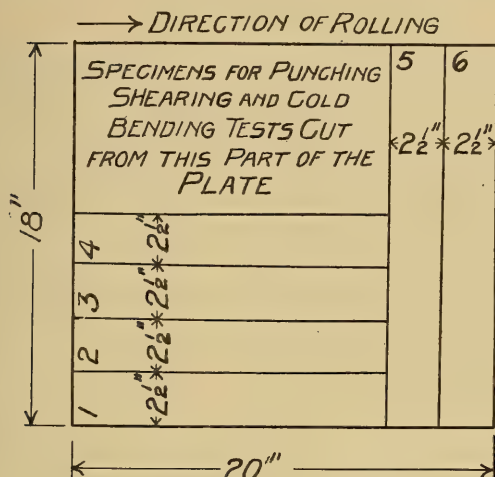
ZINC PLATE SHOWING LOCATION OF SPECIMENS.
